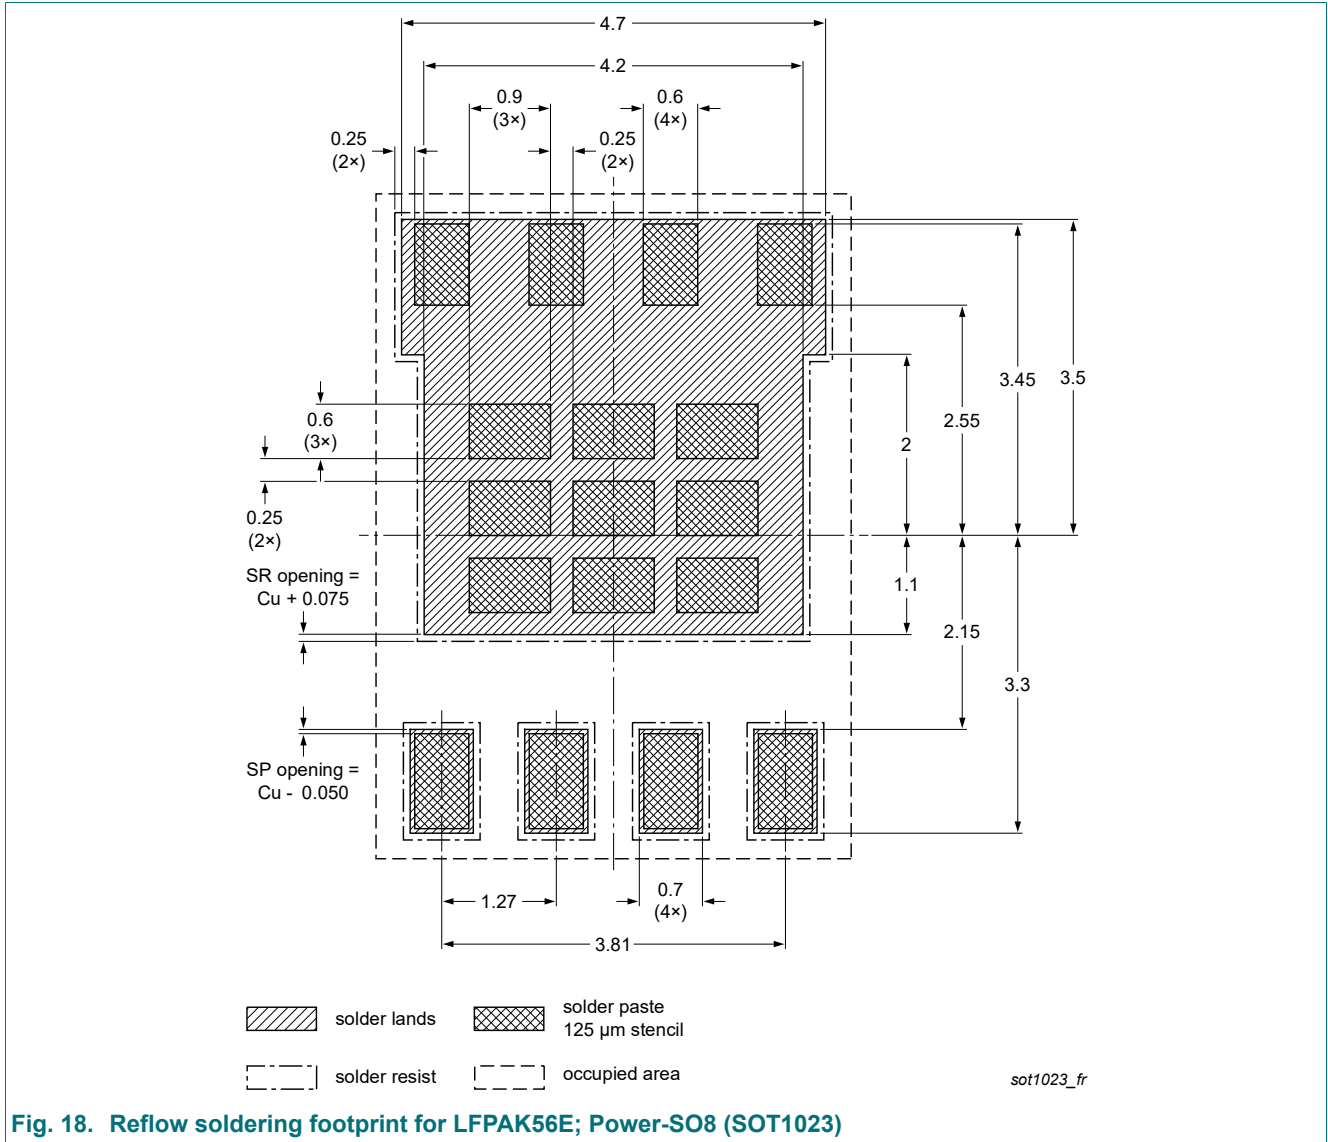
Reflow soldering footprint for LPAK56E; Power-SO8 (SOT1023)
